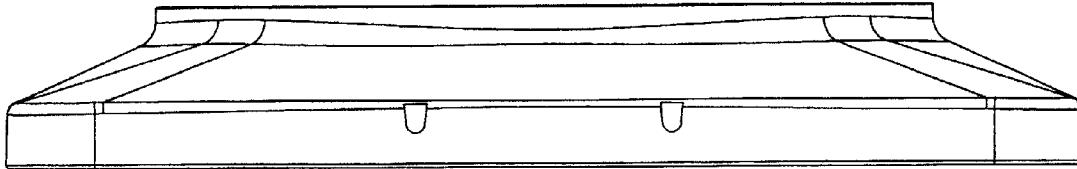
is a top view of the combined fan assembly and shroud portion shown separately for clarity of illustration.
